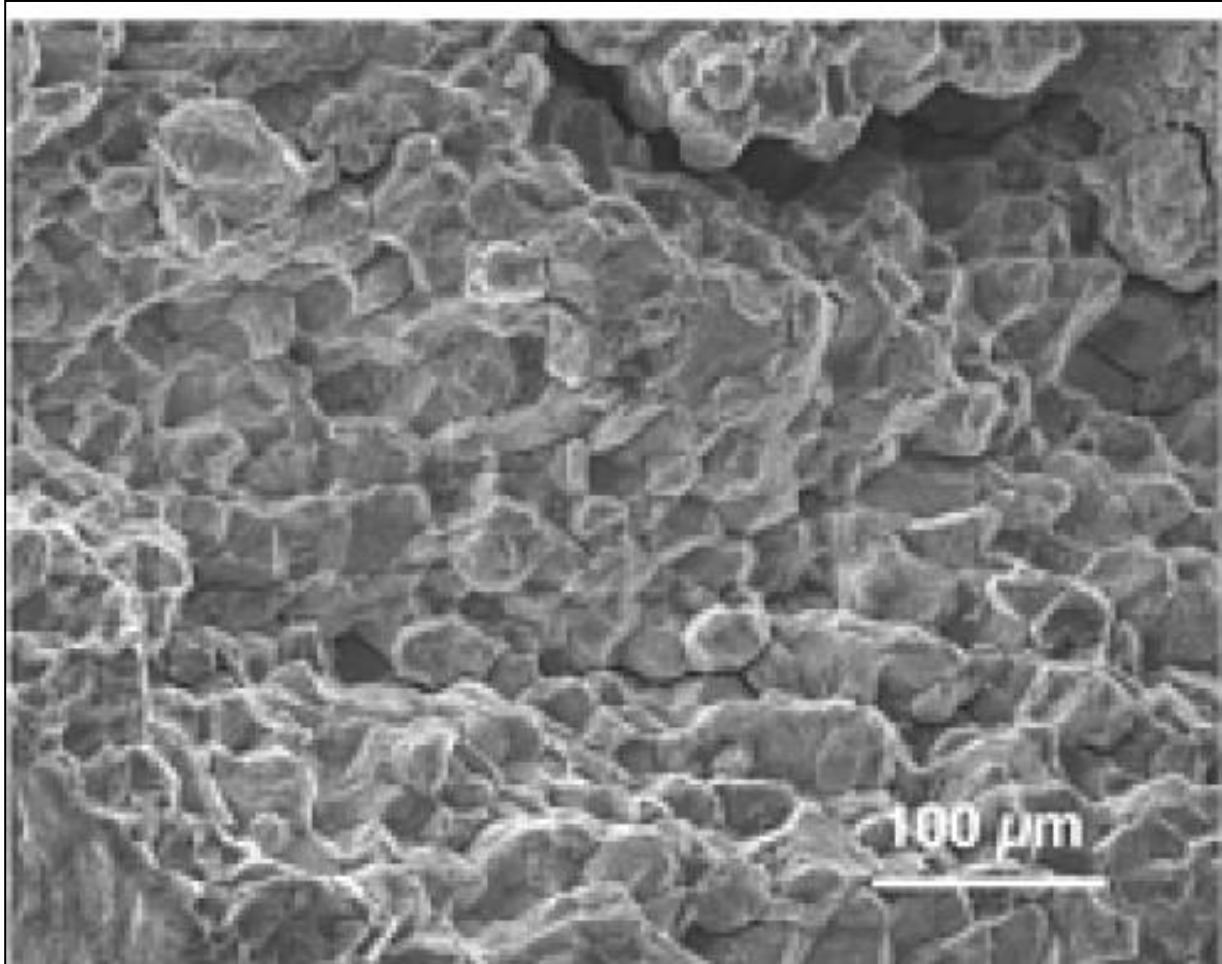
Stress-corrosion cracking in a 316 stainless steel orthopedic implant
